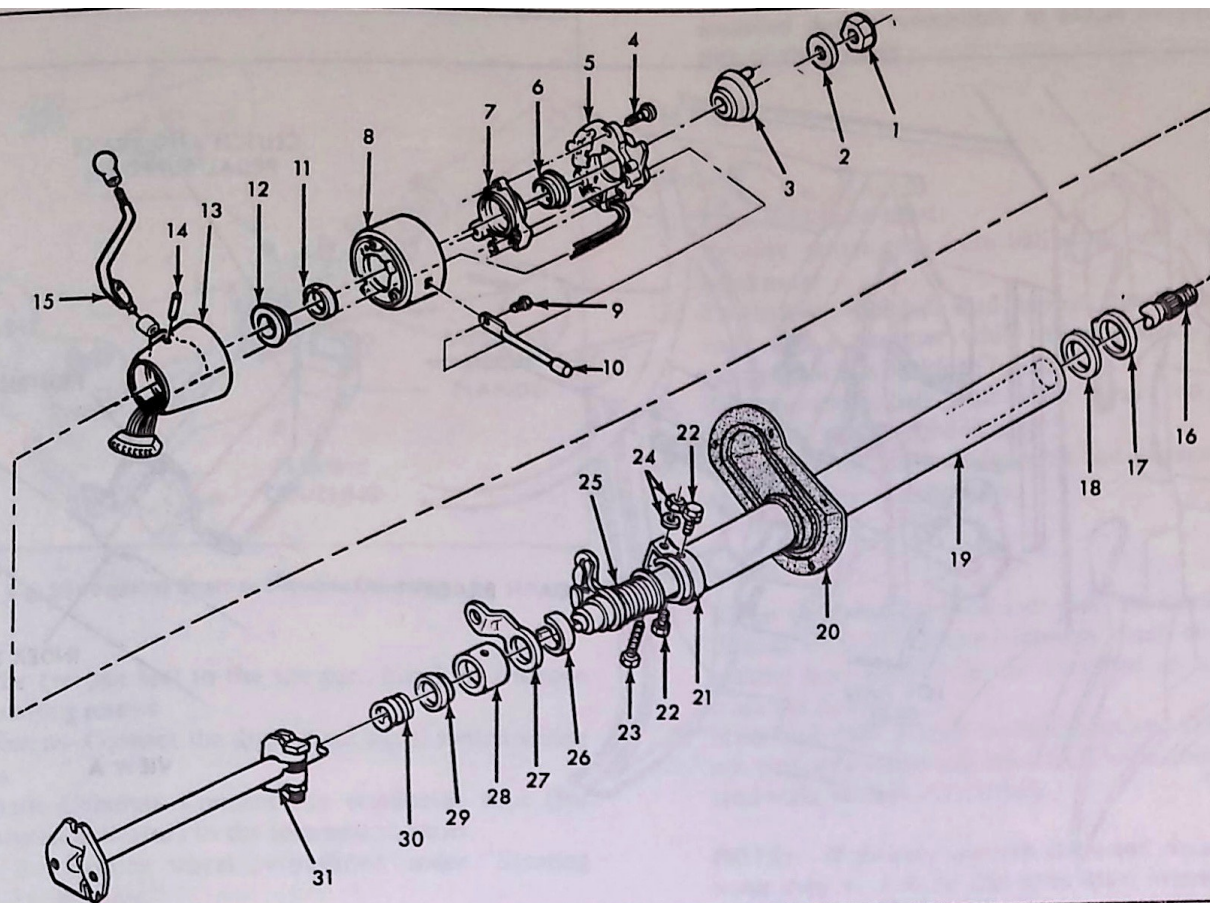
Steering Column (3-Speed Transmission)—Explode
